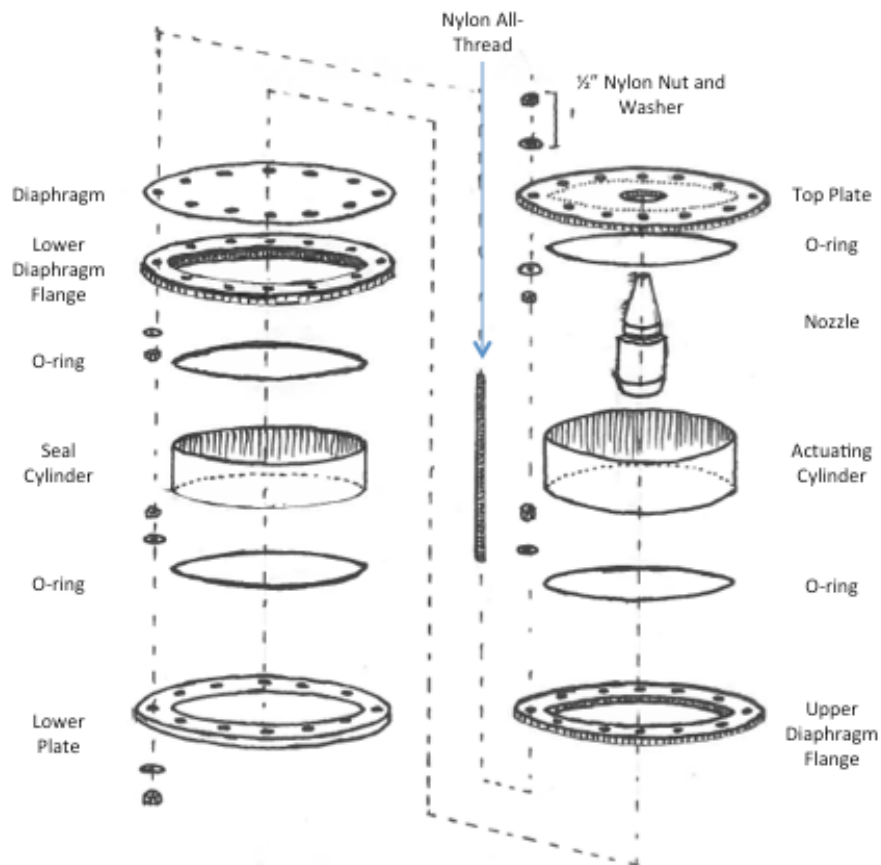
Exploded diagram of nozzle and diaphragm-valve assembly
